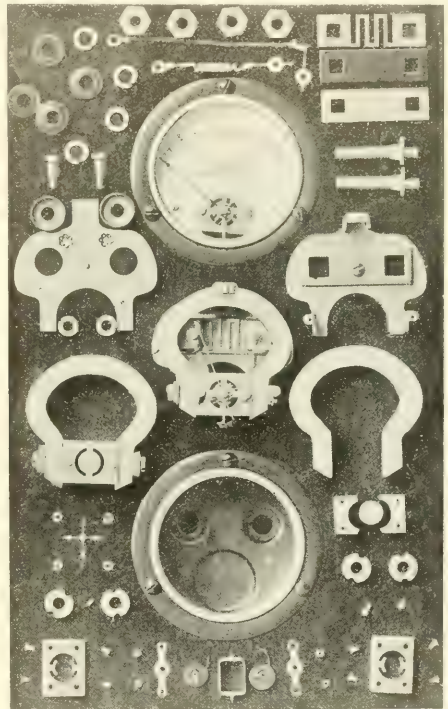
EXPLODED VIEW OF INSTRUMENTS SHOWN IN FIG. 3
